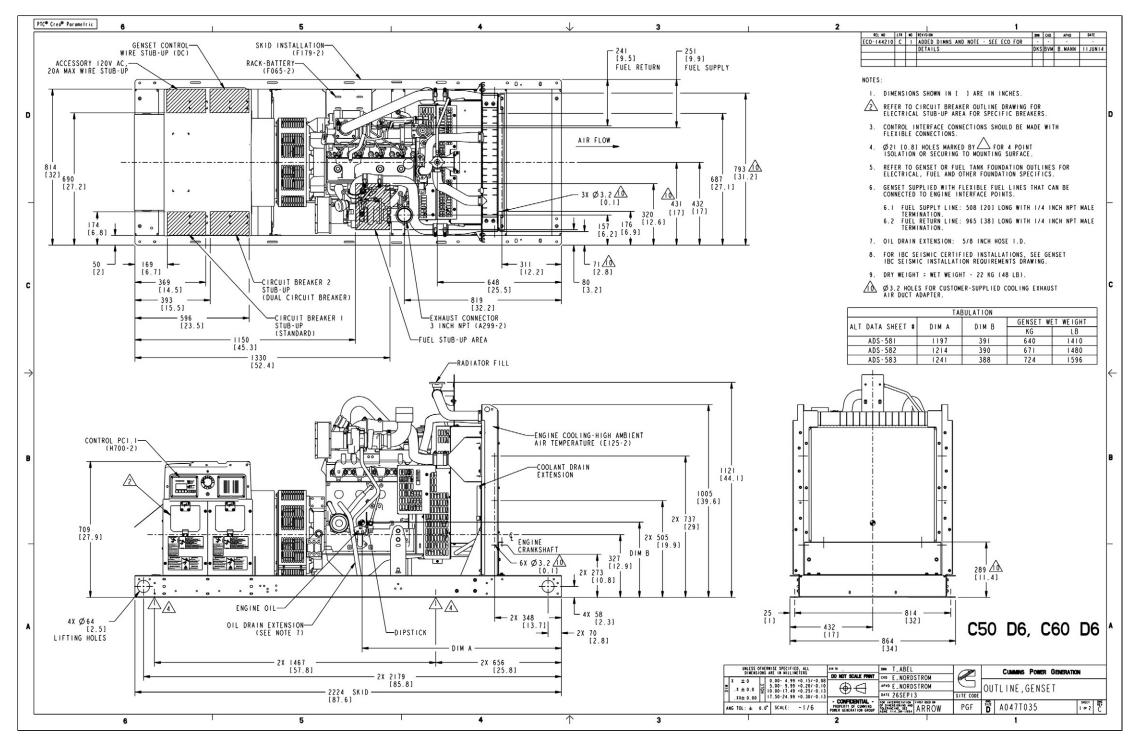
GENERATOR SET OUTLINE, OPEN (50 AND 60 KW) (SHEET 1 OF 2)
